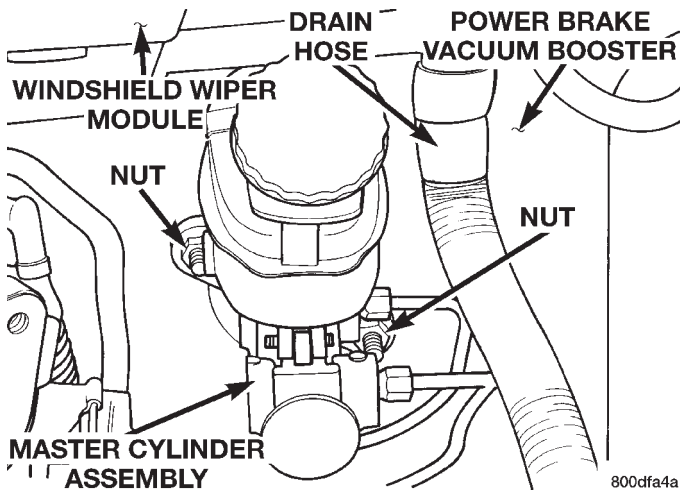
Master Cylinder Attachment To Vacuum Booster
